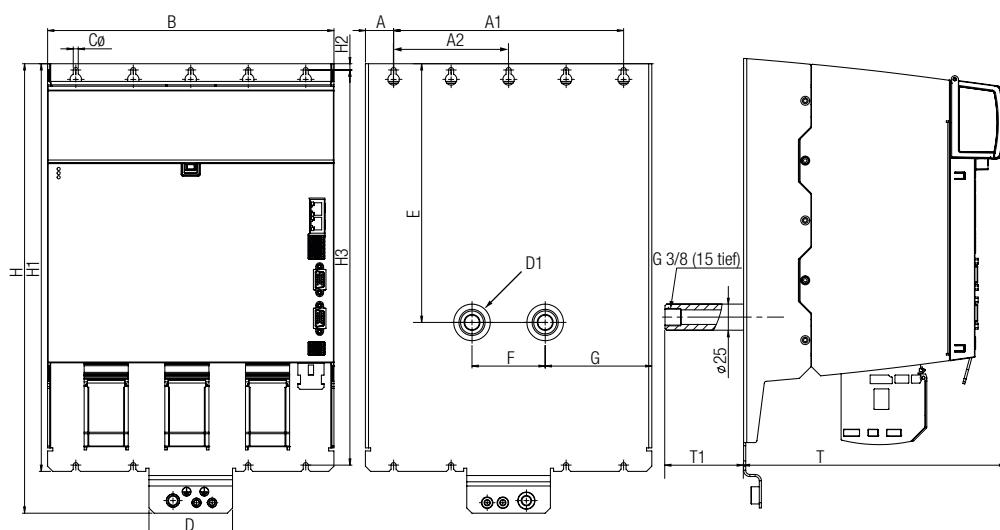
Dimensional drawings, KeDrive D3-DA BG4
